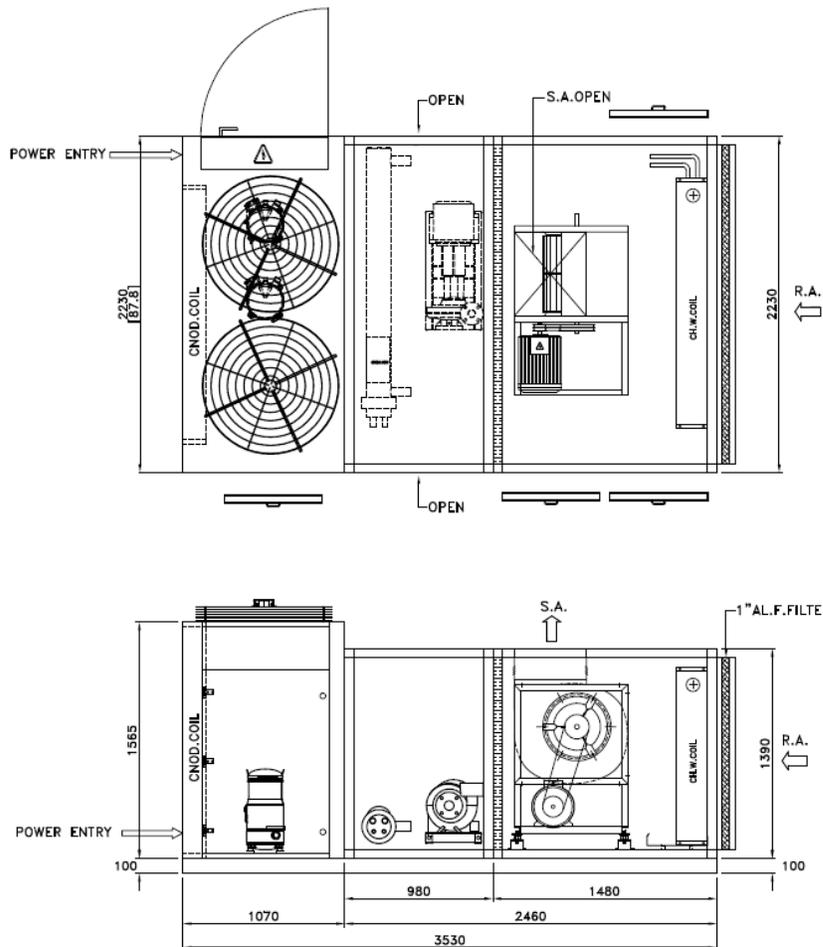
Top and Side Views of 70 kW Prototype Air-Cooled Chiller
